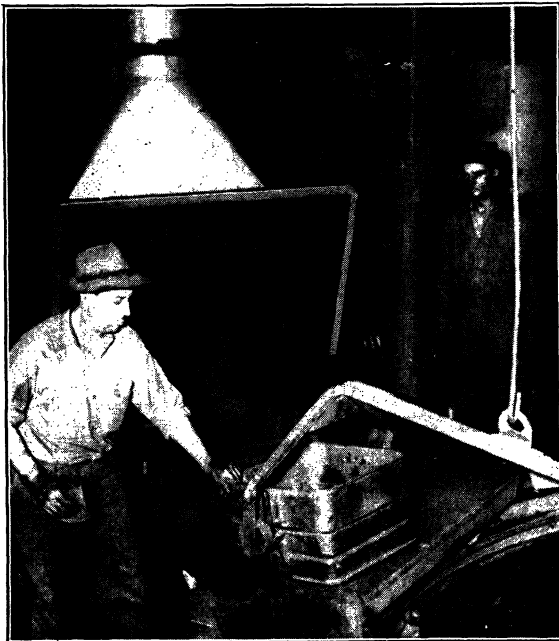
FIGURE VIII. Dust-Control Hood at Small Casting Shakeout (Courtesy American Air Filter Co.)
